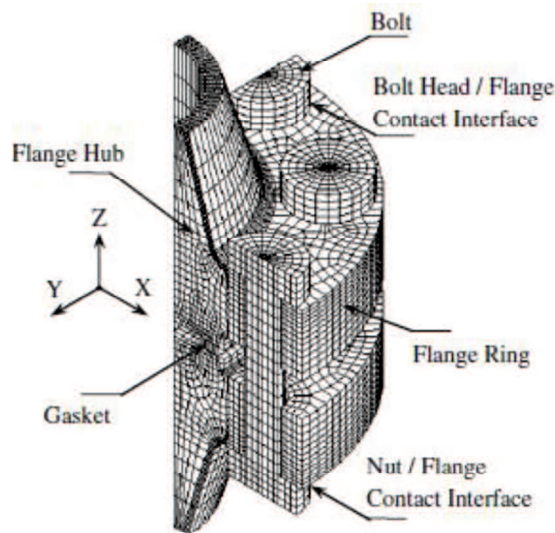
Finite element mesh of bolted flange joint with spiral-wound gasket (Adapted from [3])
